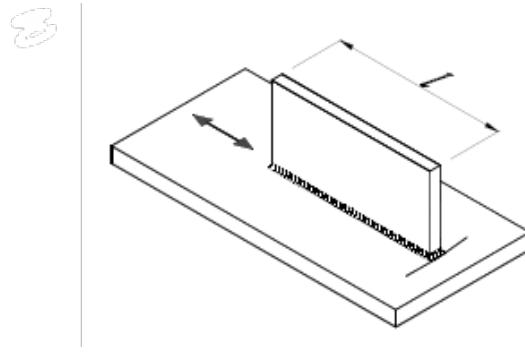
The welded longitudinal attachment places the weld detail in class E (DNV-GL 2014)
